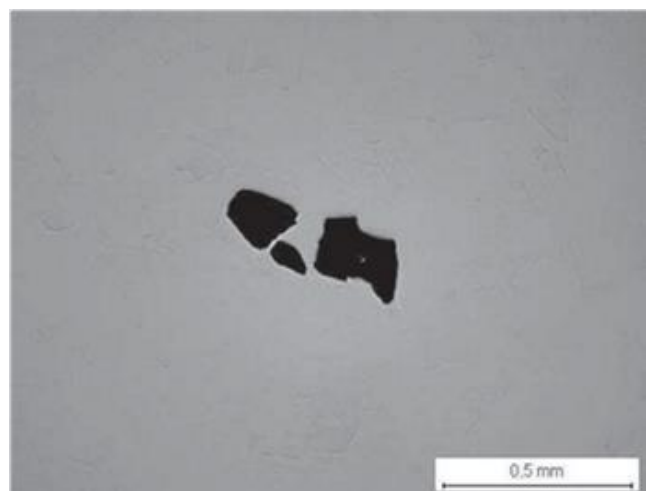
Pores in the overlap zone of a 50 mm thick copper FSW weld [21]
